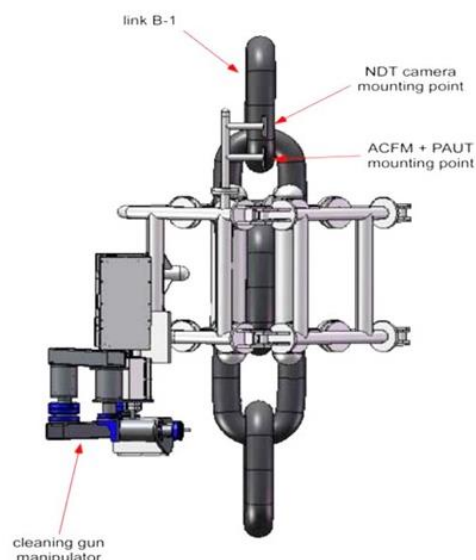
'Chain test' PAUT inspection mechanism [117]
